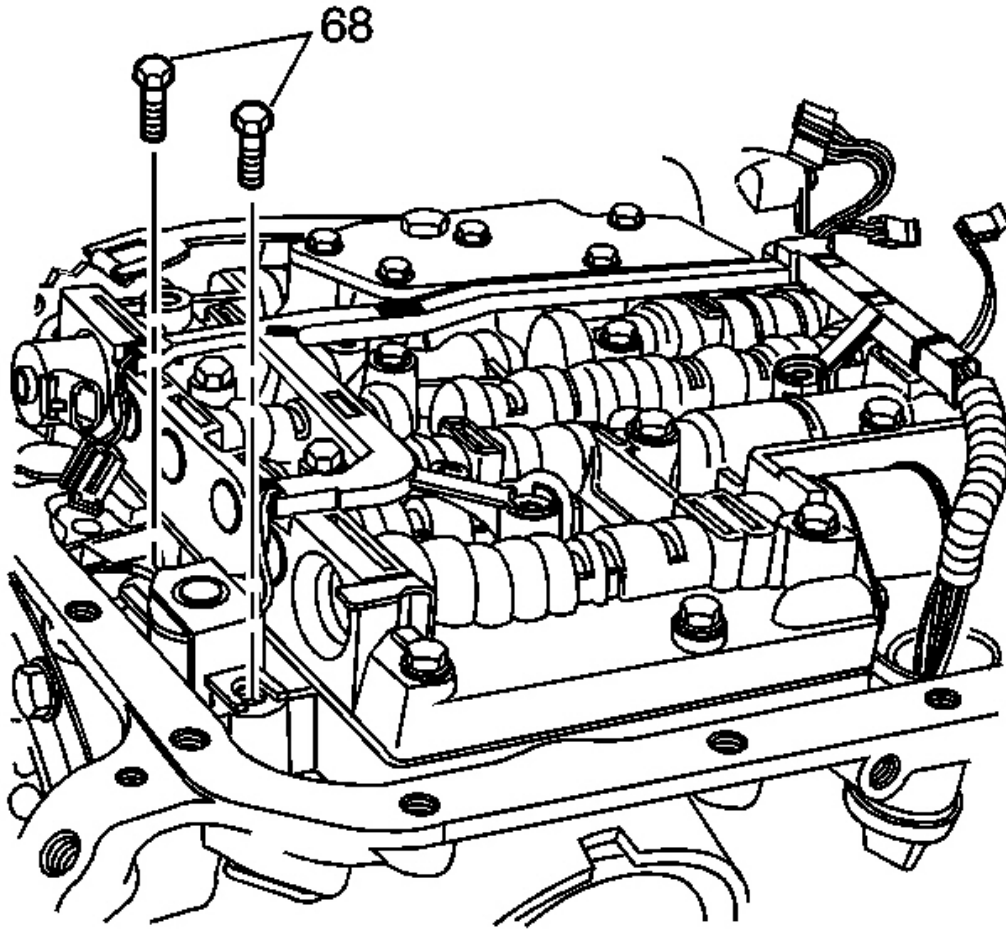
Identifying TCC Solenoid Valve Mounting Bolts
